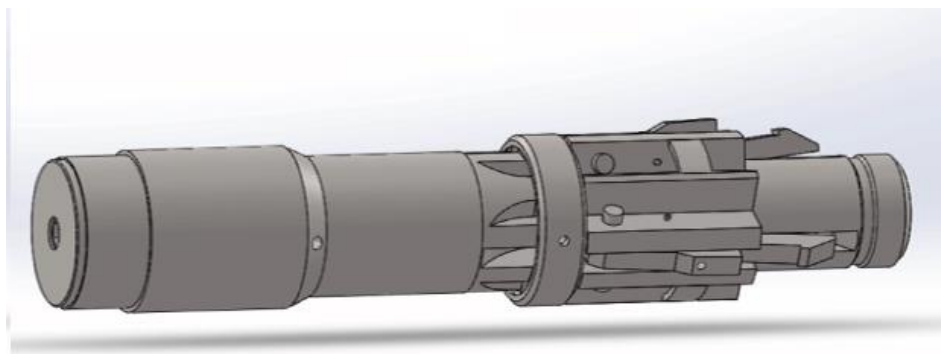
View of the disengaged tool: the teeth are kept fully opened by the springs.
